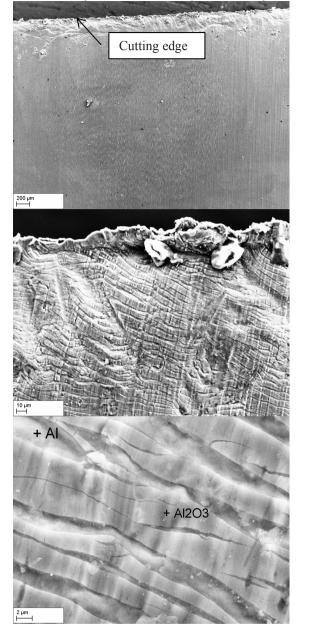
Topography of aluminium printing strip after slitting with rotary knives
